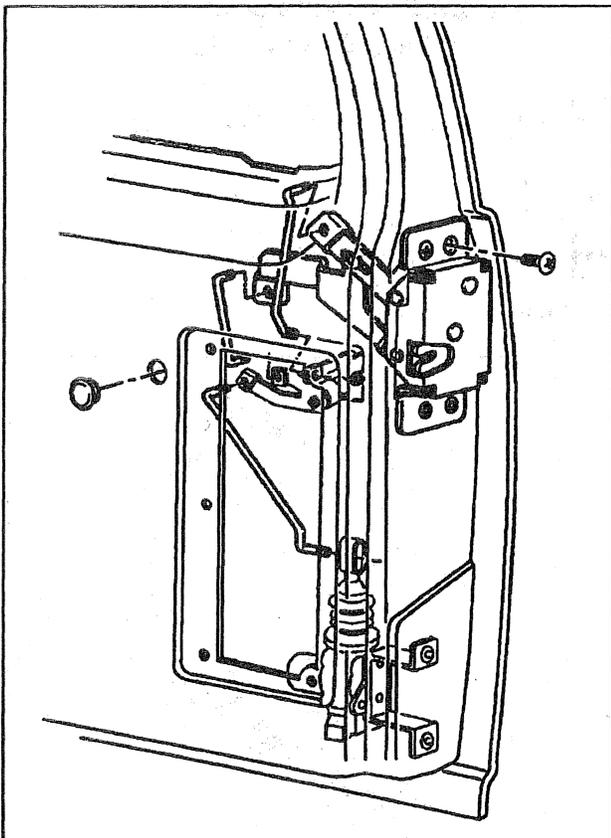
Rear Cargo Door Outside Handle and Lock Control Rods
